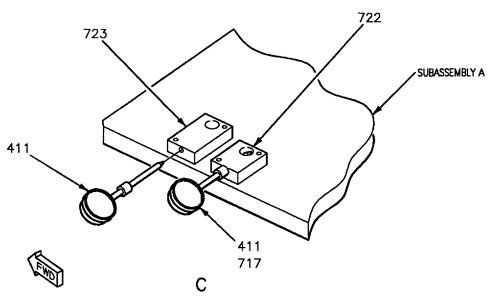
Inner Wing Attach Lugs (Sheet 2)
